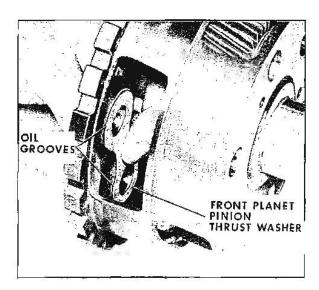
Installing Long Pinion Front Thrust Washer
